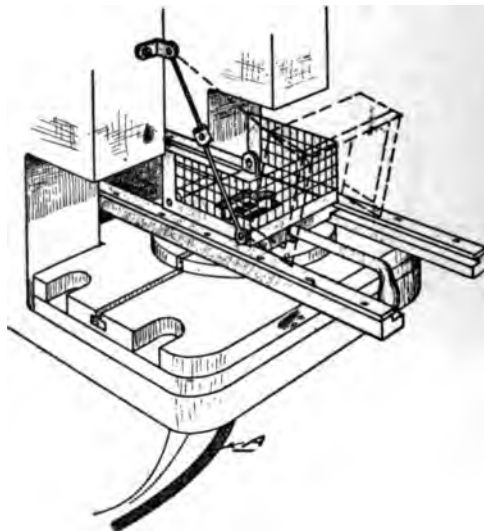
STAMPING PRESS SLIDE FEED AIR EJECTOR
